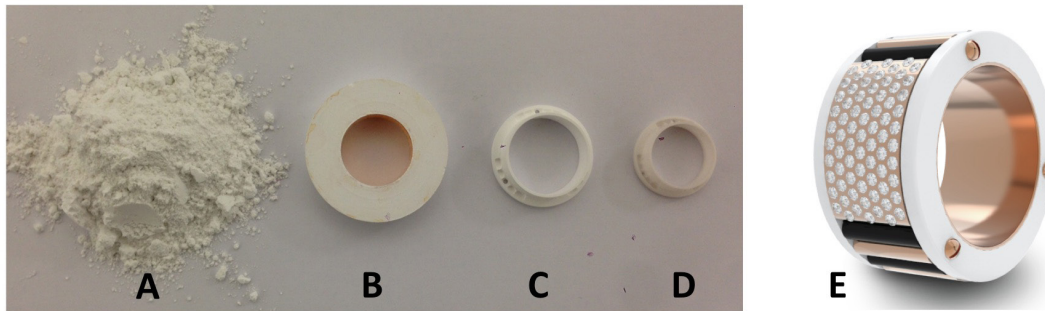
Several stages of the production of a zirconia component: A) zirconia powder; B) zirconia blank of compacted powder; C) Machined component in green-state; D) Sintered zirconia component; E) Zirconia component assembled in the final jewelry piece of zirconia, yellow gold and diamonds.
